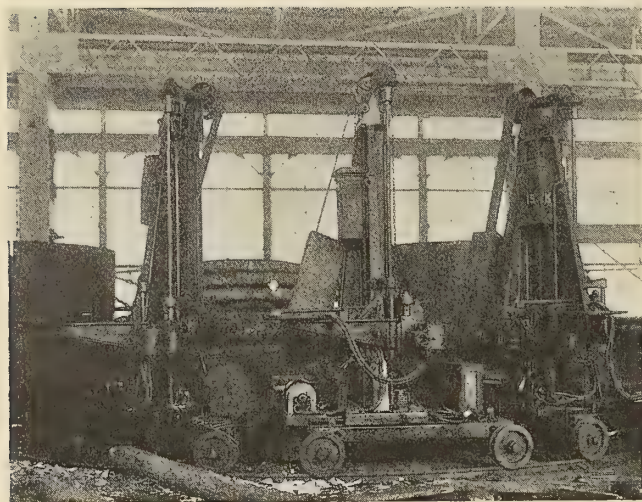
Three-Head Boiler Shell Drill in the Boiler Shop
